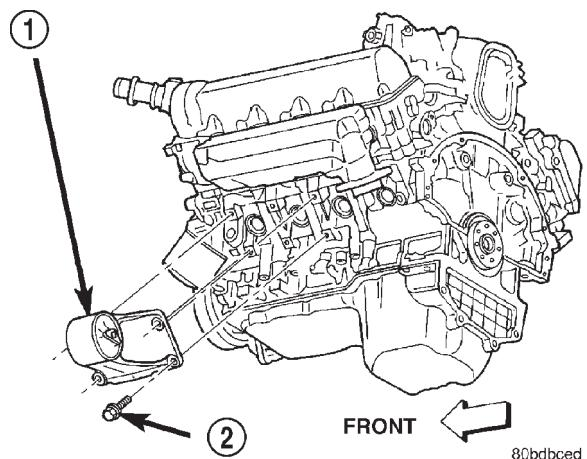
Engine Insulator Mount 4x2 Vehicle—Left Side
